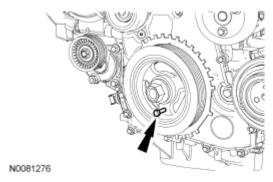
Identifying 6 mm x 18 mm Bolt Courtesy of FORD MOTOR CO.
